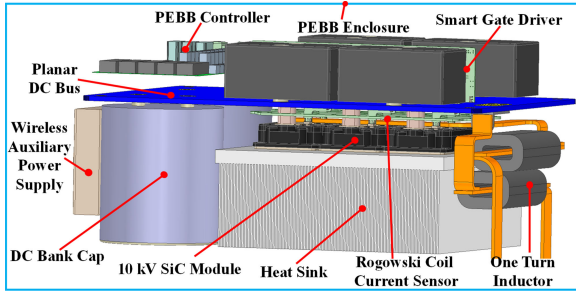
Three-dimensional drawing of MV PEBB converter prototype.
